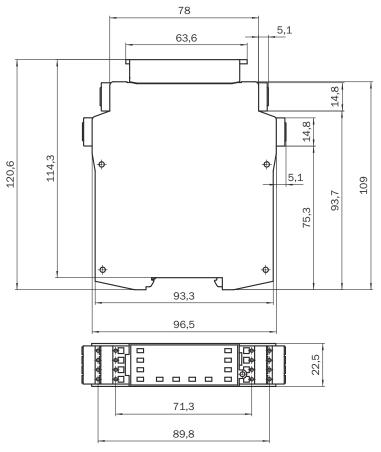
Dimensional drawing UE410-SD400 Dimensions in mm
